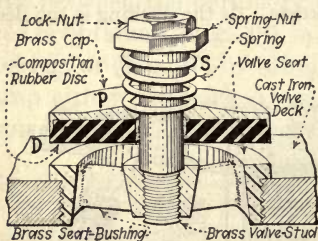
Flat-Seated Pump-Valve With Composition Rubber Disc.
